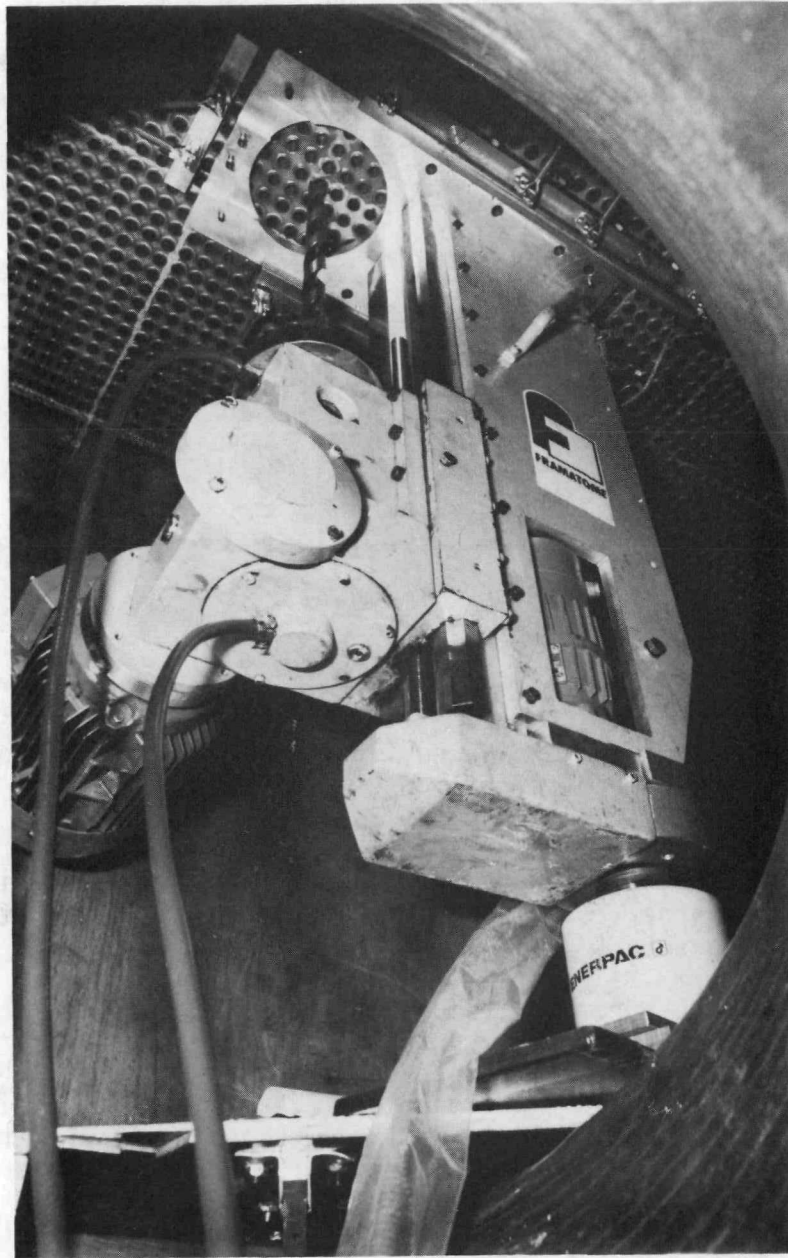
Tube Sheet Section Drilling Equipment
